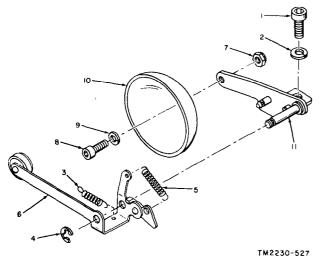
Carriage-rack drive shaft, exploded view (TT-98C/FG and subsequent models).
